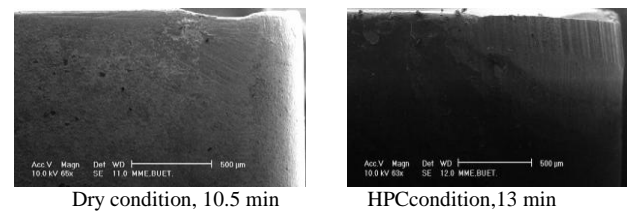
SEM views of auxiliary flank of worn out tip of SNMM insert
